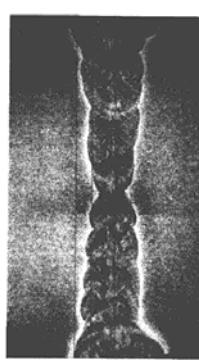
Typical narrow groove weld produced in mechanized welding applications
